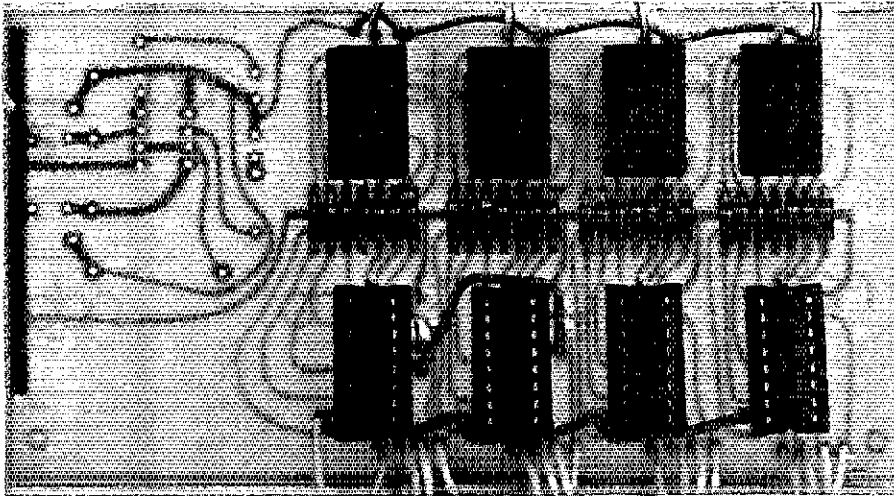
Parts placement guide for the display circuit board, not shown at actual size. These views show the component side of the board. Parts on the area of the board at the left will be assembled at a later time.
